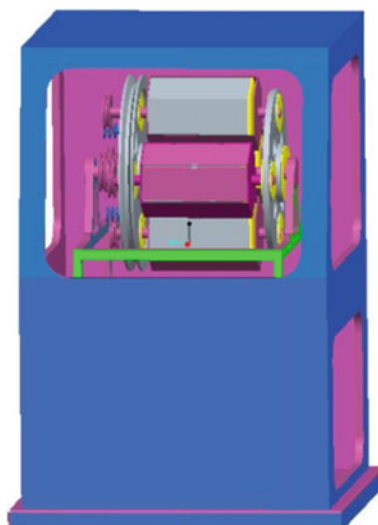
Basic structure diagram of centrifugal barrel finishing equipment. 1—Motor; 2—motor belt wheel; 3—tie-rod belt wheel; 4—central shaft; 5—center belt wheel; 6—planetary belt wheel; 7—rotary shaft of the barrel; 8—barrel; 9—tie-rod
